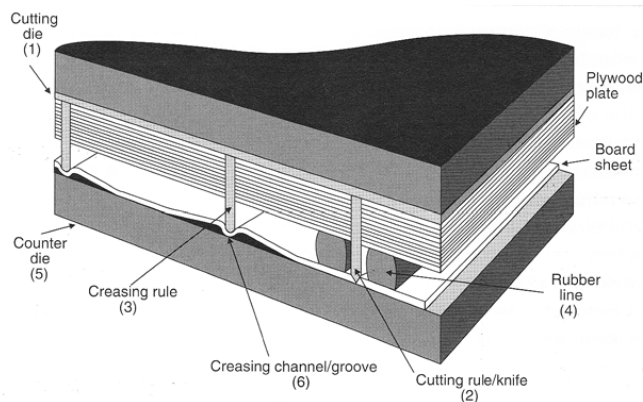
Flat bed cutting and creasing of a board sheet (Lahti et al. 2008).
